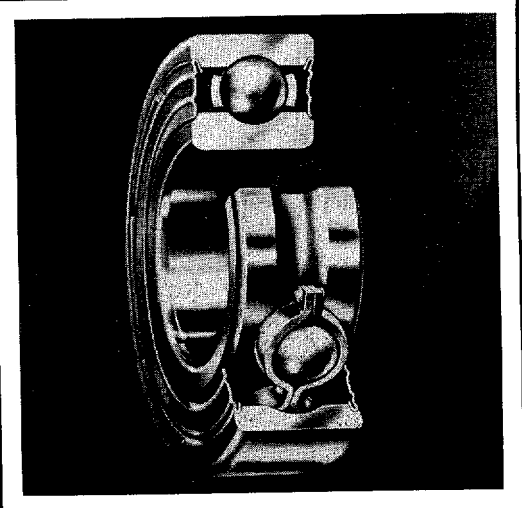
Various types of ball bearings are used on motors. Above unit is a double-shielded type.
